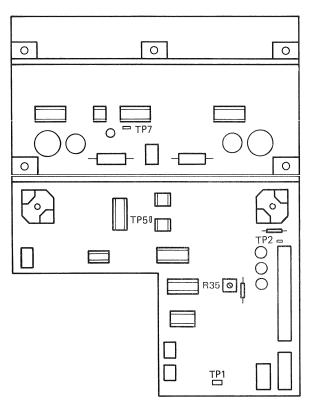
Spooling motor control PCB 1.727.340
